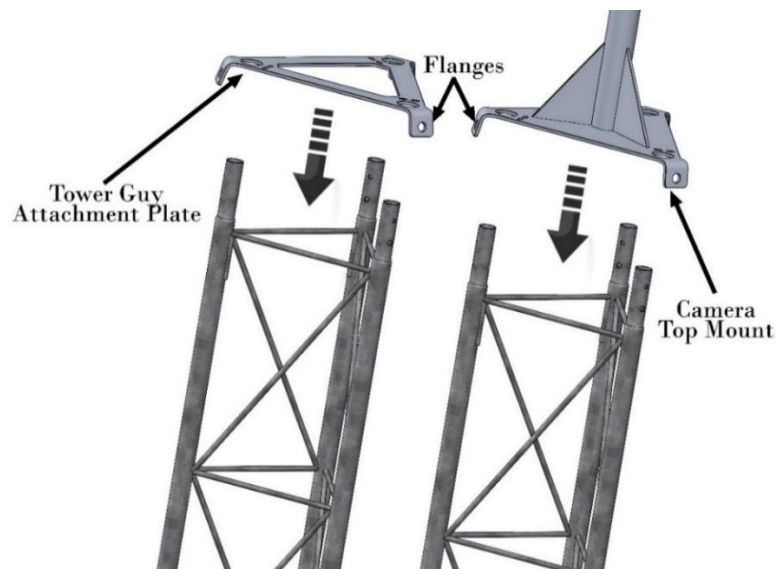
Tower Guy plate attachment plate / camera top mount plate assembly
